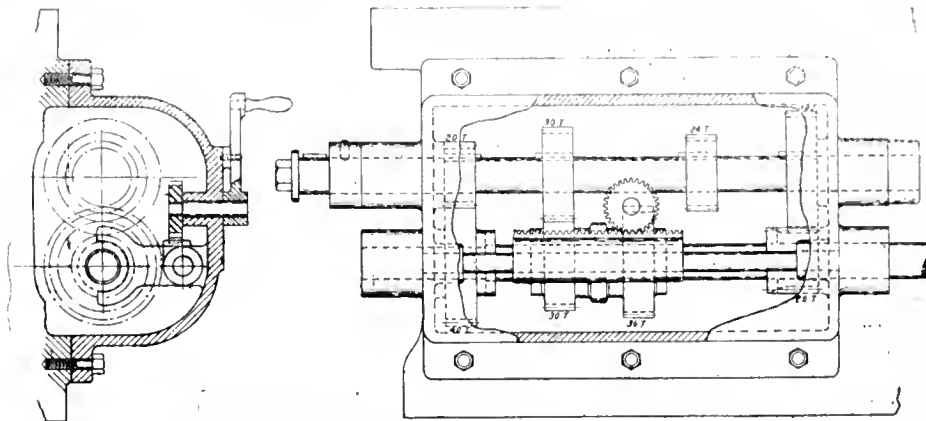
FEED CHANGE GEAR BOX SHOWING SLIDING GEARS ON FEED SHAFT.
